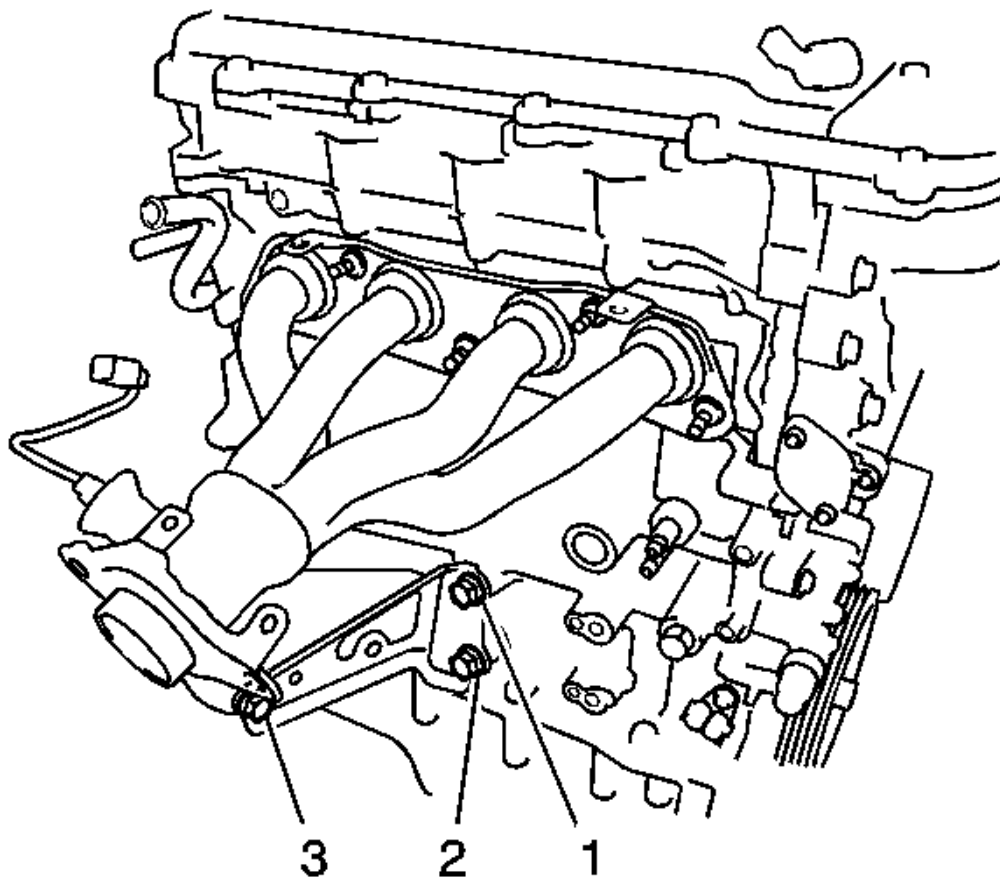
Identifying Exhaust Manifold Bolts & Stay
